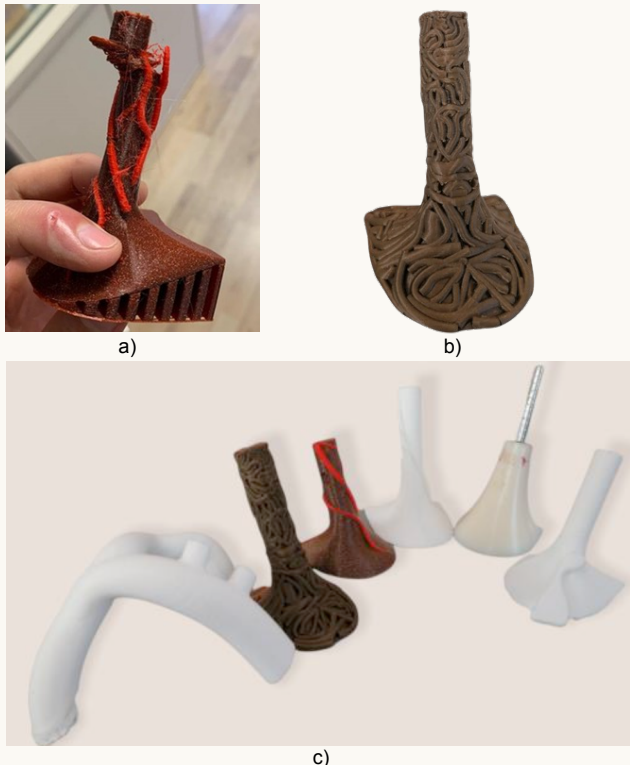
Test 3D printing: a) deformed heel appearance, b) incorrectly constructed heel and c) examples with errors
